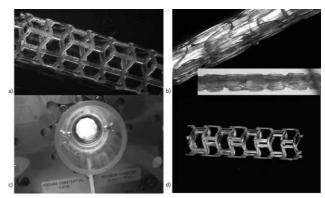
Stent: a) before crimping process, b) crimped on balloon catheters, ready to implantation, c) crimper,d) opened after crimping (bright area-material tension)
